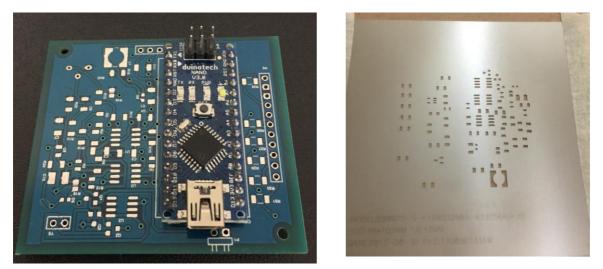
MANUFACTURED PCB AND STENCIL FOR REFLOW SOLDERING
